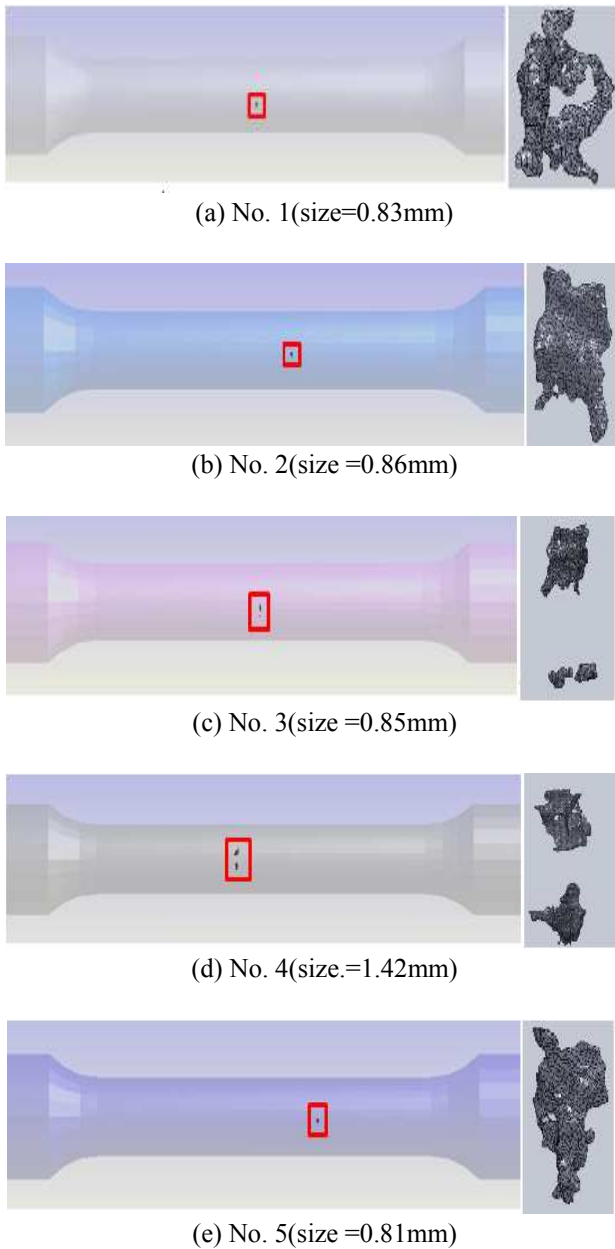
Shape and location of defects extracted by CT on specimens shown at Fig. 8
